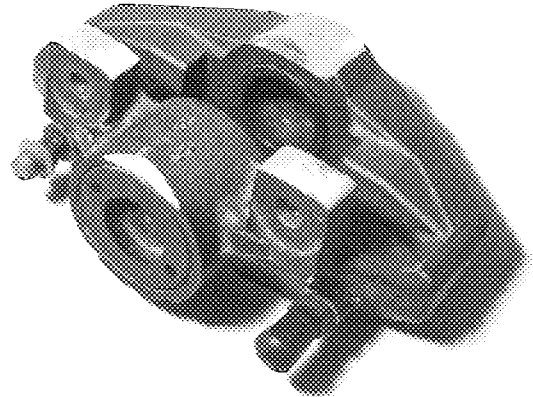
FRONT AND/OR REAR BRAKE CALIPER TYPE 5, 6
